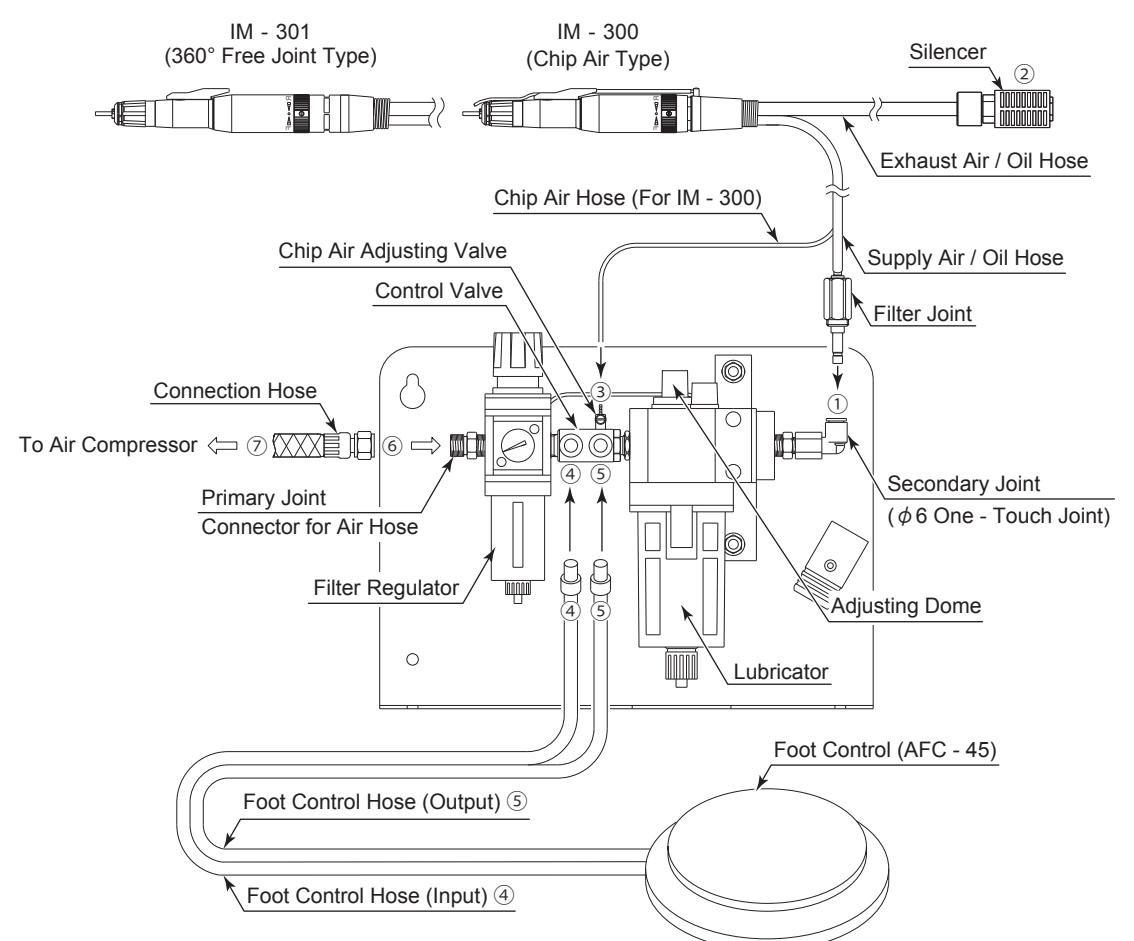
Connection of Air Line Kit " AL - H1207F (Sold Separately) "
